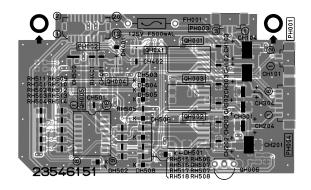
U0031 CAM Switch PC Board (Bottom Side)
